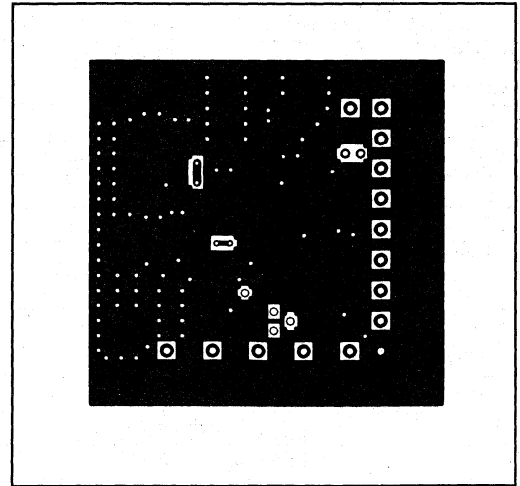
Layout Demonstration Board - lower copper layer (SCALE 1:1)
